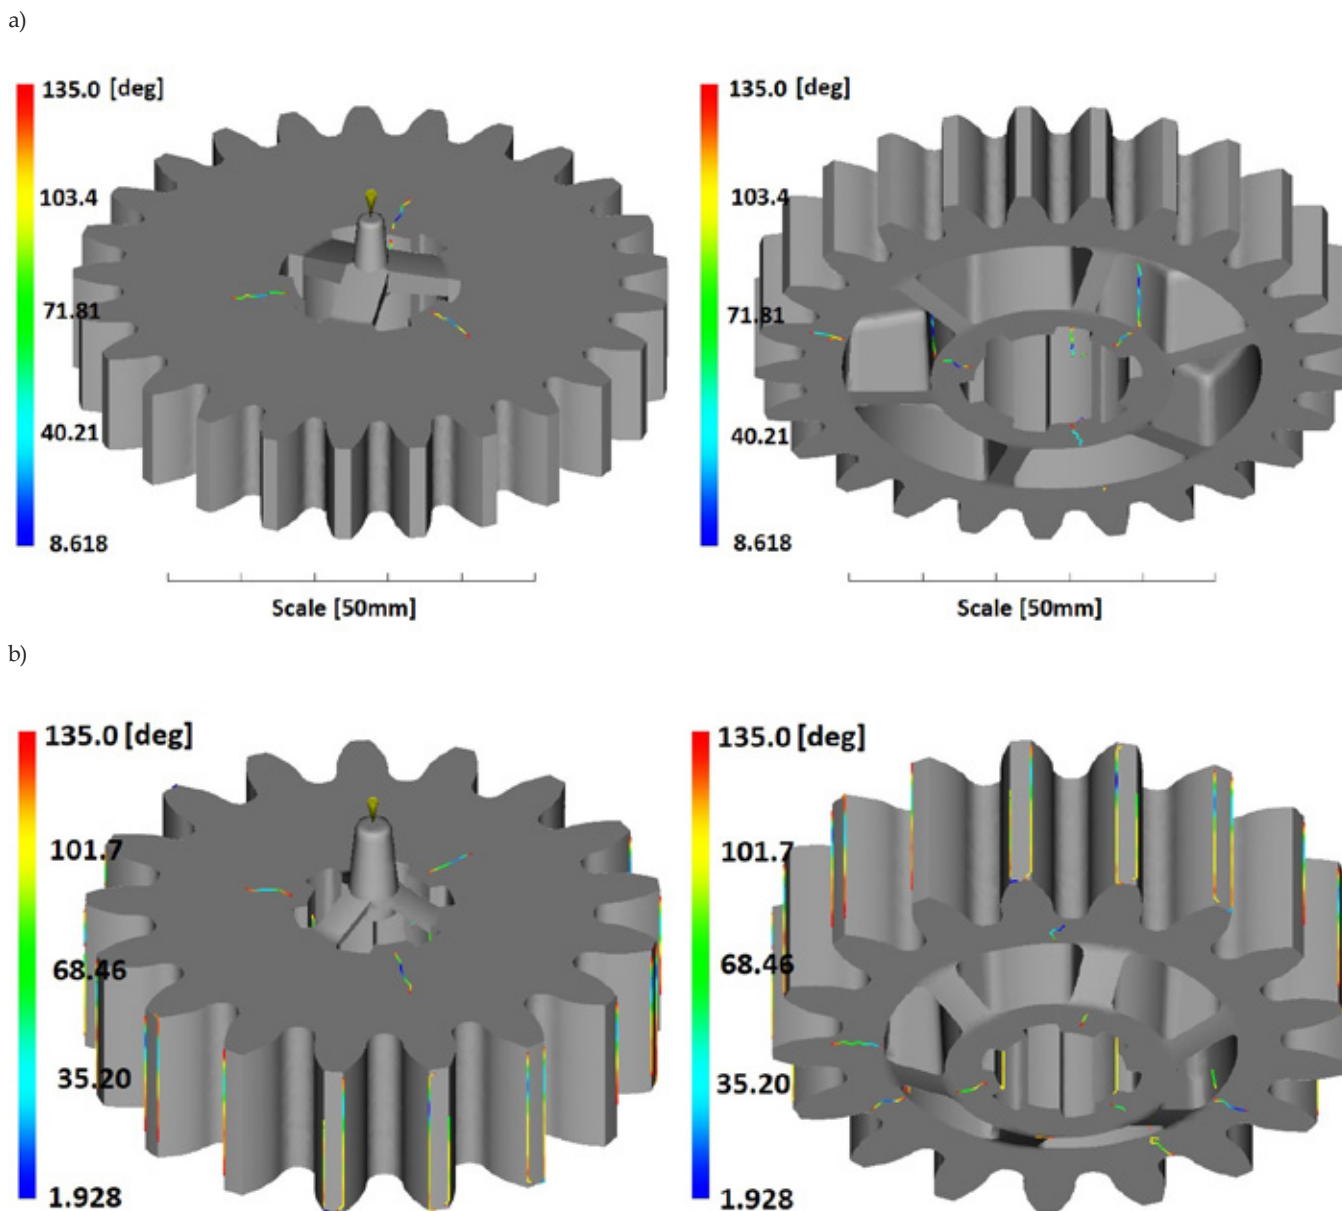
Arrangement of the connection line for gear wheel: a) KZ25, b) KZ17
